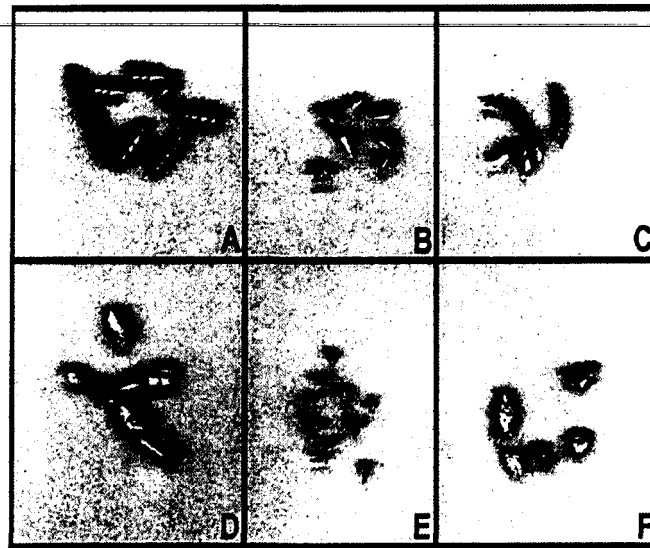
Generated chip forms: (A) conical; (B) fan shaped; (C) chisel edge; (D) amorphous; (E) needle; and (F) impacted.¹¹⁶
